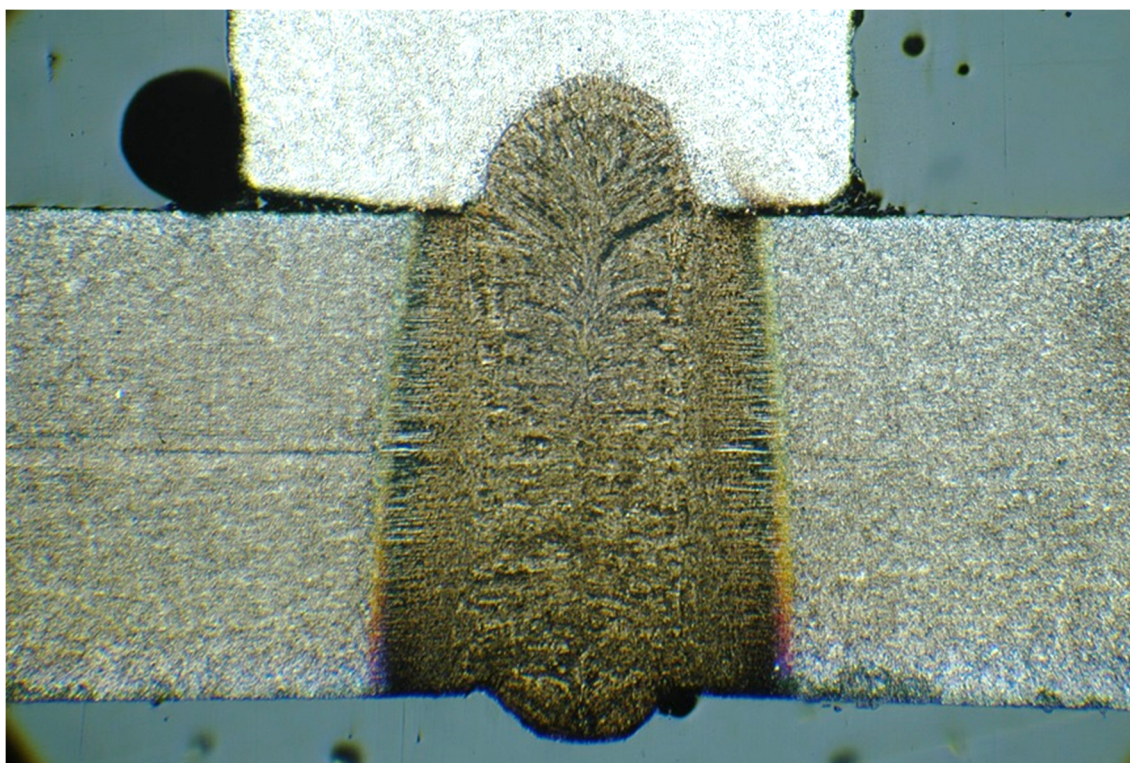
Typical cross section of laser weld of I-core steel sandwich panel
